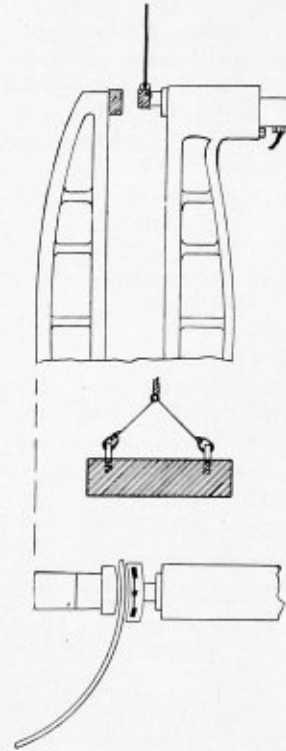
BENDING PLATES IN A STATIONARY RIVETER.
